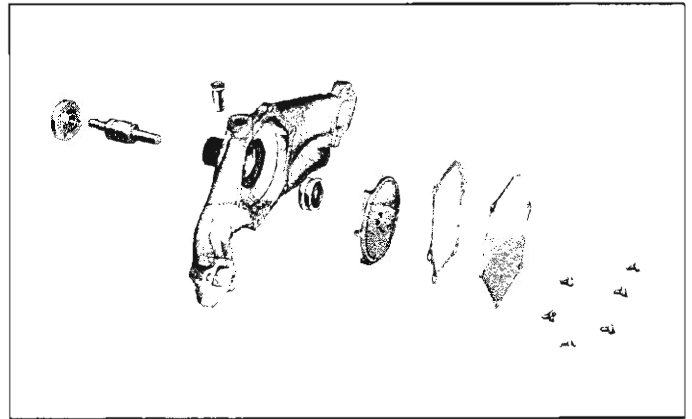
8 Cylinder Pump Disassembled (348 Cu. In.)
